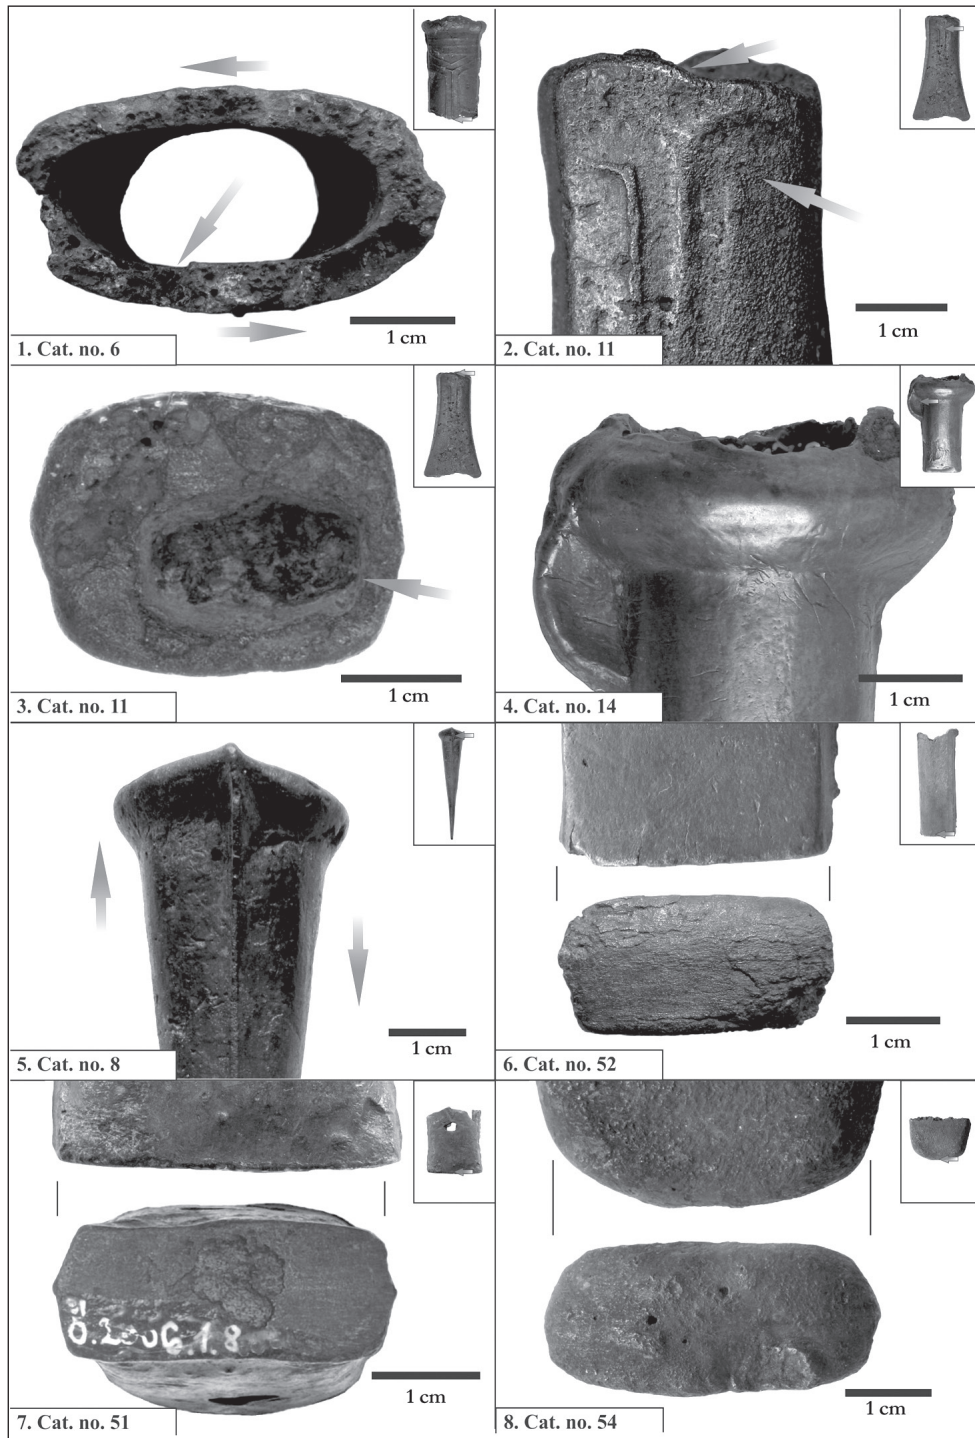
Observations made during the macroscopic examination of socketed axes and socketed hammers. 1: Horizontal mould shift defect; 2: Amorphous pattern and incomplete upper part of a socketed axe; 3: Core shift defect; 4: Dysfunctional loop; 5: Vertical mould shift defect; 6: Burred face of a hammer; 7–8: Unrefined and unused faces of socketed hammers
